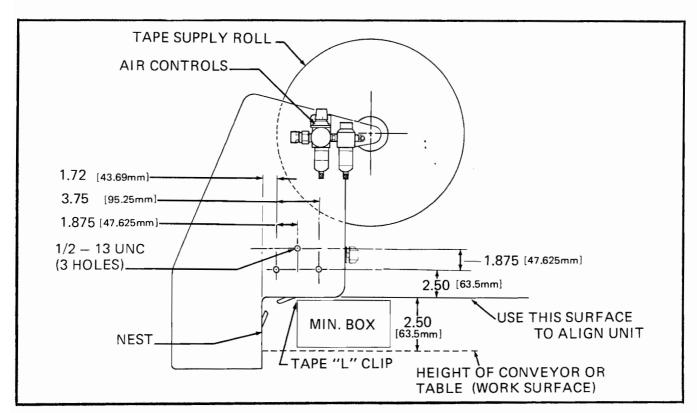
MOUNTING TOP TAPING POSITION - LEFT SIDE VIEW
